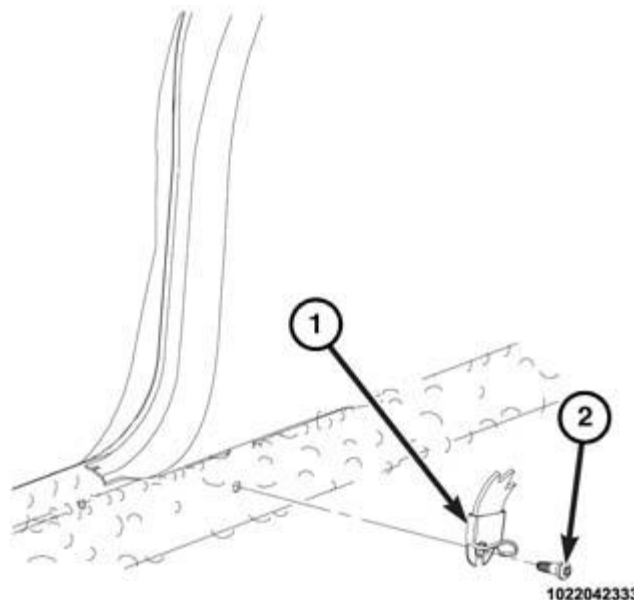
Front Seat Belt Lower Anchor Plate & Screw
